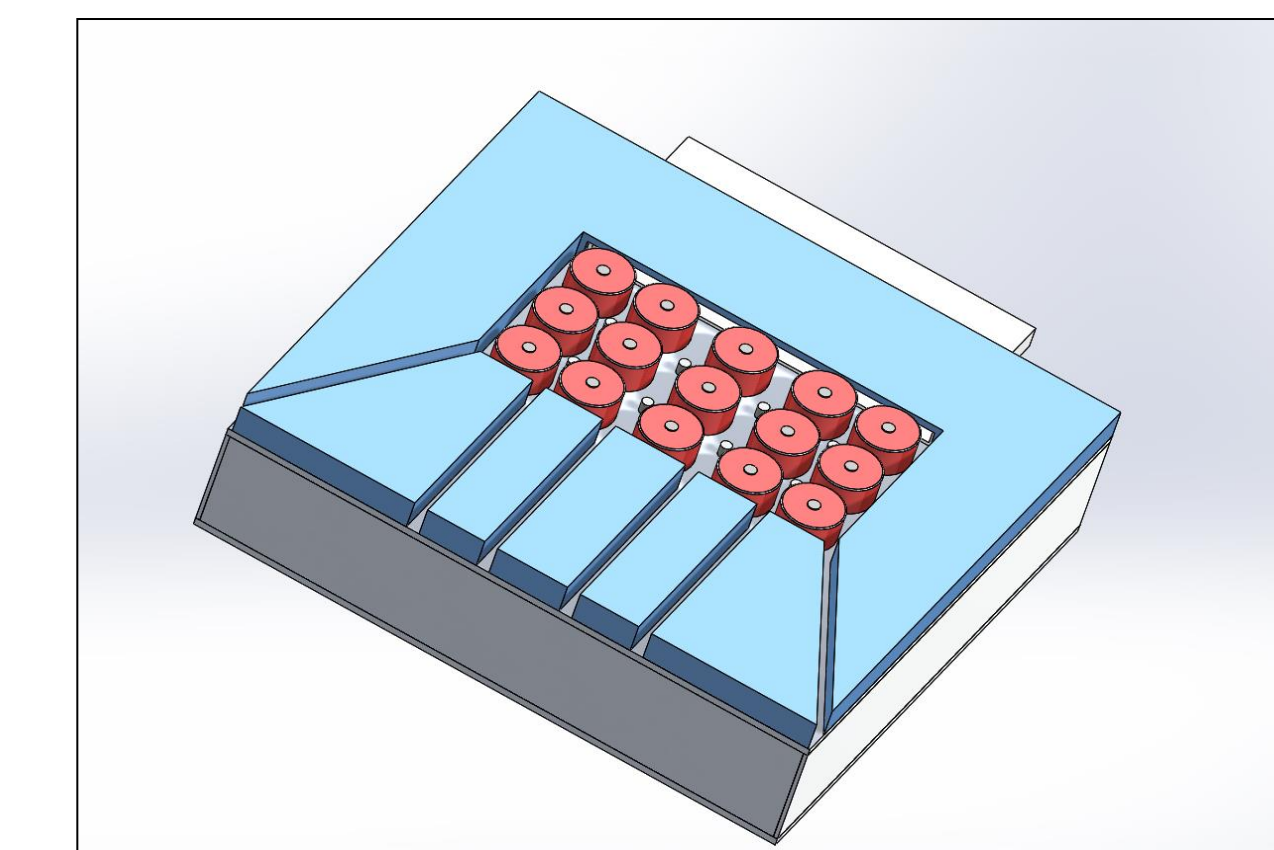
Displays a solid works representation of the Smart Cushion Device. Using a Vacuum Former to manufacture the bladders, sheets of flexible was heated, then pressed down on a mold of the desired bladder shape. Suction was applied for 30 seconds to form the bladders. Threaded Hex PVC pipe bushings were friction welded to the PVC shower pan liner at 1200 rpm create a bladder-frame interface. Oatey X15 PVC adhesive was used to adhere the top final bladder configuration. The seam failure stress, tested using an Instron mechanical testing frame was 50 psi \pm 1.8.
